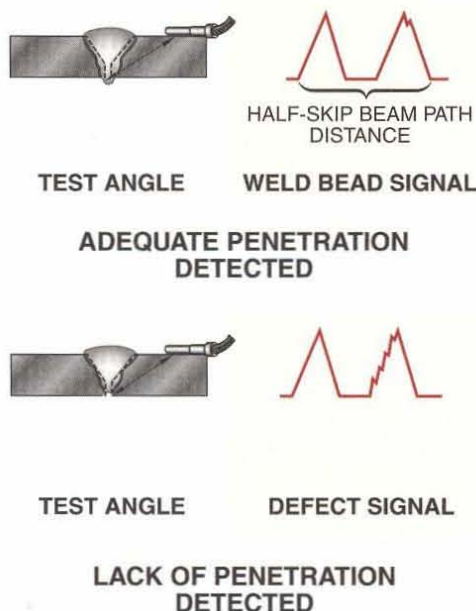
UT of the weld root is carried out using an angled probe and is performed from both sides of the weld whenever possible.
